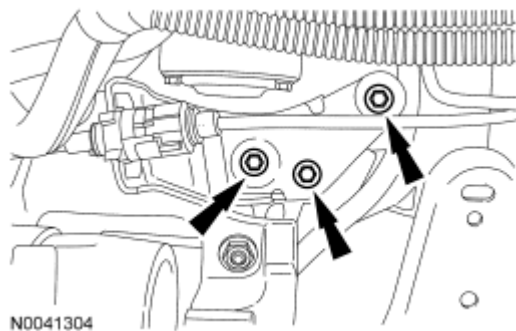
Locating Transaxle Control Cable Bracket Bolts
